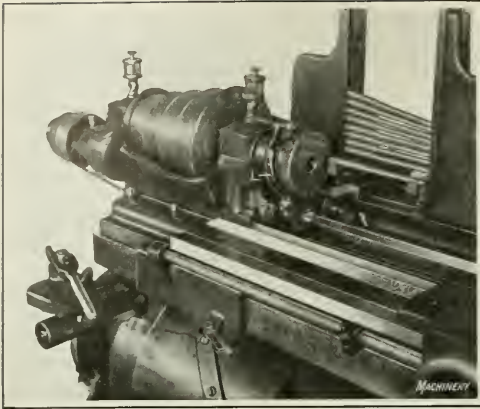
Close-up View of Head End of Machine, showing Chuck and Work-feeding Mechanism
